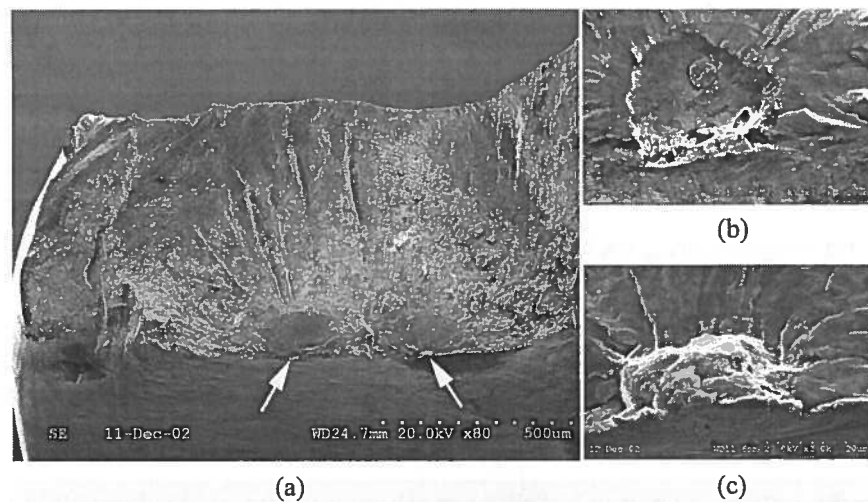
High temperature fatigue fracture surface and crack initiation site in LC IN-625.
